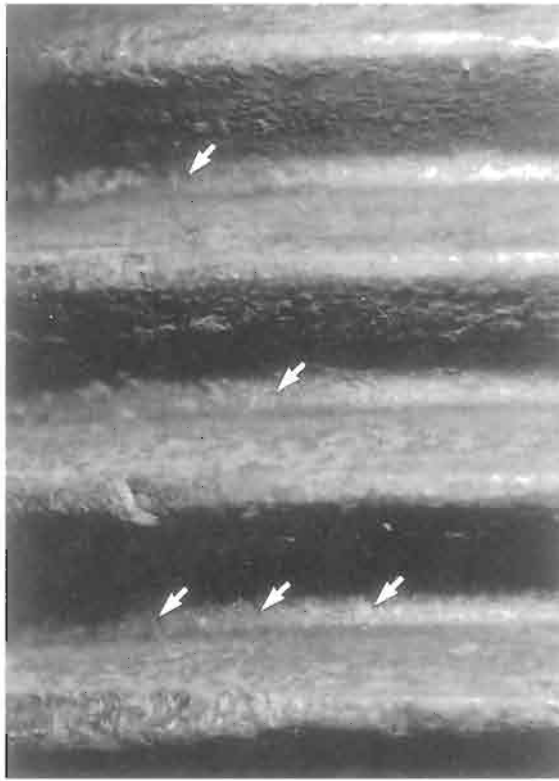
General surface condition of the bolt threads, showing evidence of pitting corrosion (arrowed).
